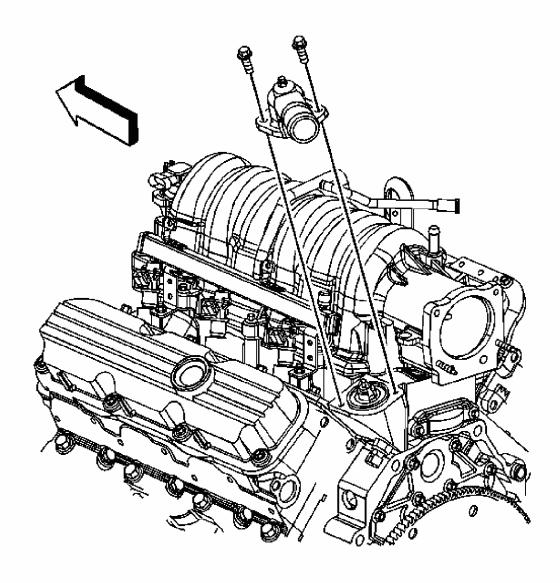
Removing/Installing Thermostat Housing Courtesy of GENERAL MOTORS CORP.
